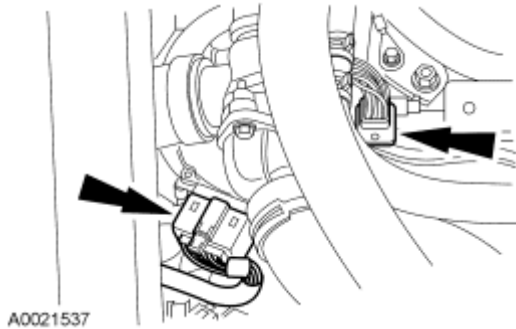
Locating Transaxle Wiring Harness Electrical Connector
